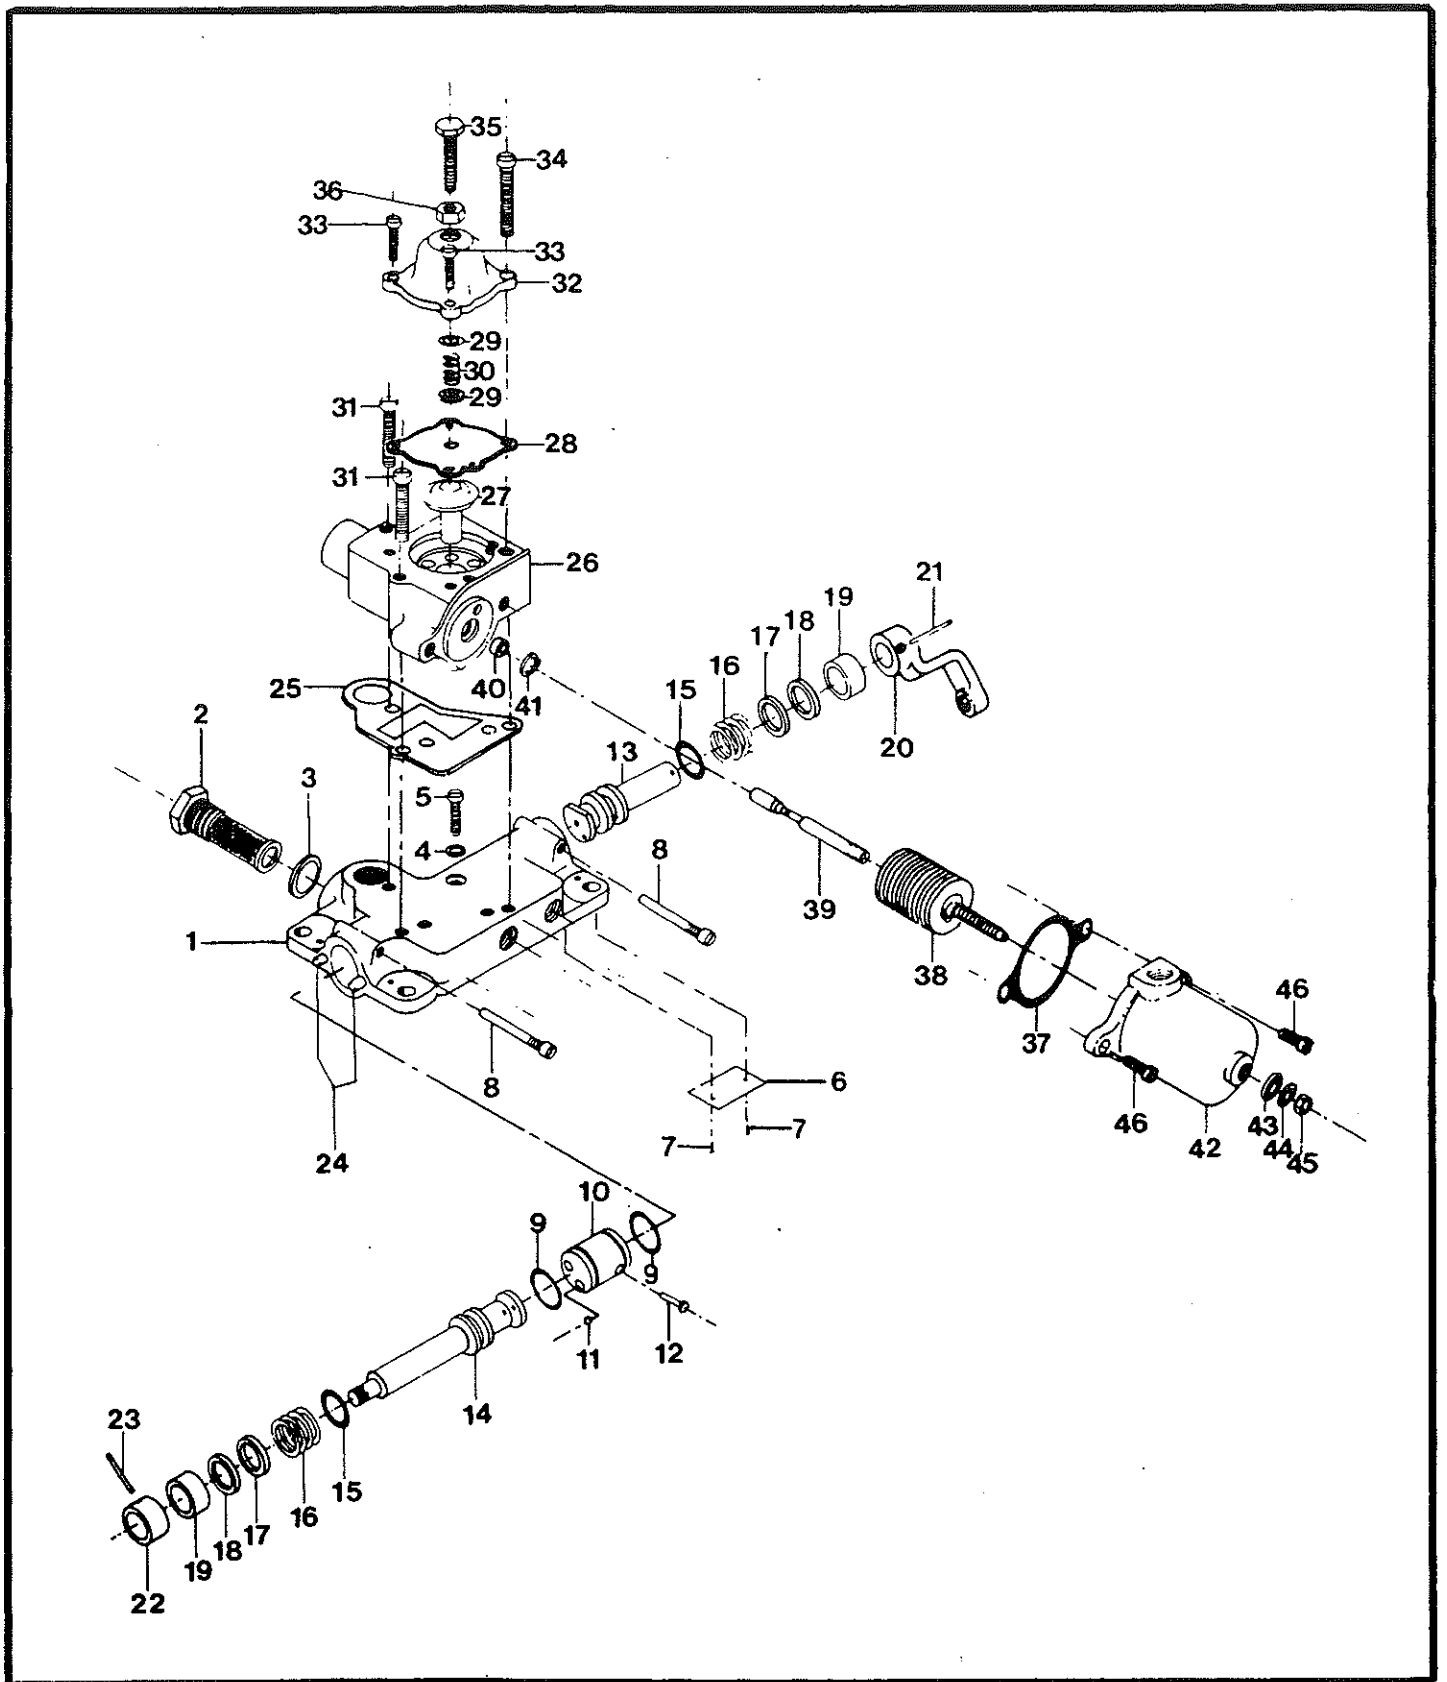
FUEL CONTROL ASSEMBLY.
